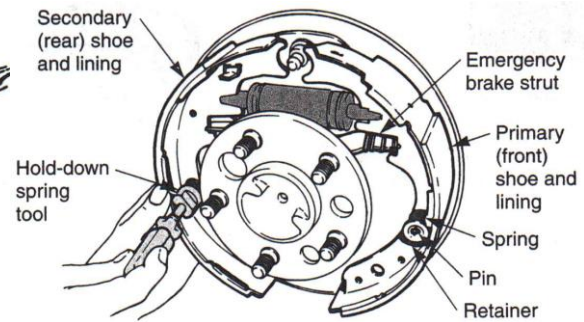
Push in and turn the tool to remove the hold-down springs. Use your finger to hold the pin on the rear of the backing plate.
